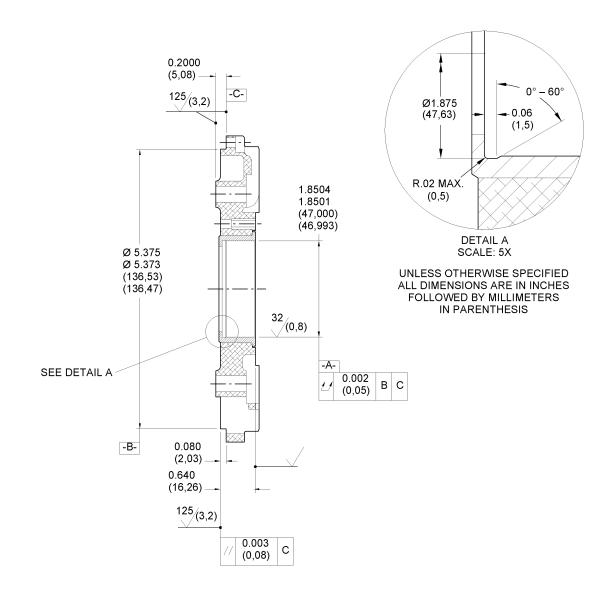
Anti-Drive End End Bell Bearing Liner Machining Specifications
